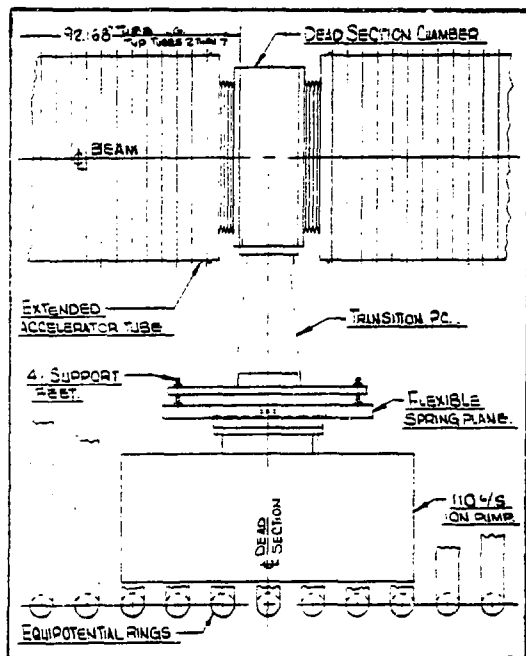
Vacuum ion pump and new dead section installation arrangement.
